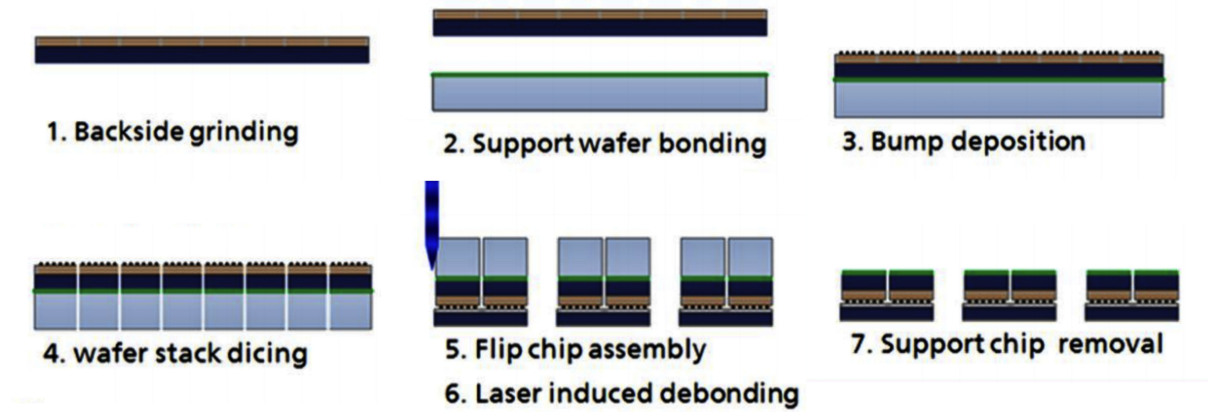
Chip flip-chip assembly process at IZM using a transparent carrier [182]. The chip wafer is grinded and attached to a support wafer, then the bump balls are deposited on the UBM on each pixel on the chip wafer and the single chips are diced. After dicing the chip is flipped to match the single sensors on the sensor wafer and finally the support wafer is removed at the end of the process.
